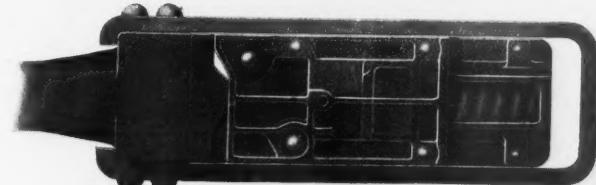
McCord Draft Gear Showing Position of the Moving Parts Under a Buffering Load of 250,000 lbs.
